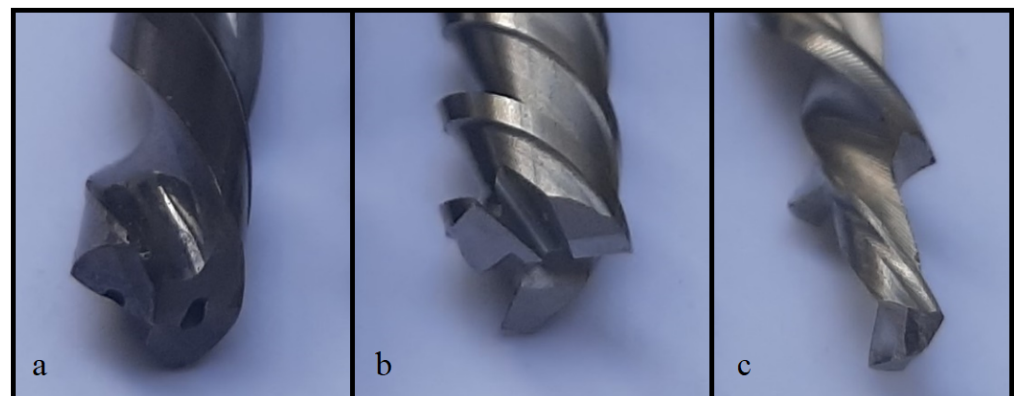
Three types of drills used: (a) solid carbide drill, (b) cobalt end mill, and (c) step drill.
